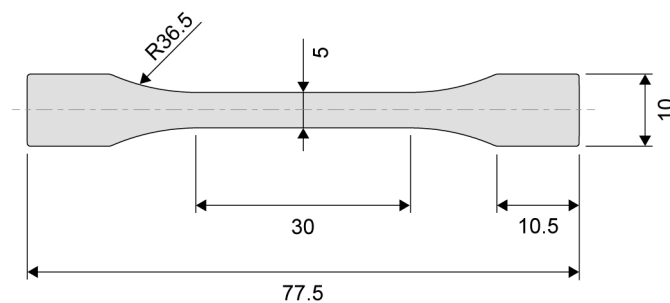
Dimensions of the tensile specimens following the ISO 527 standard for type 1BA [56], with a thickness of 2 mm.
